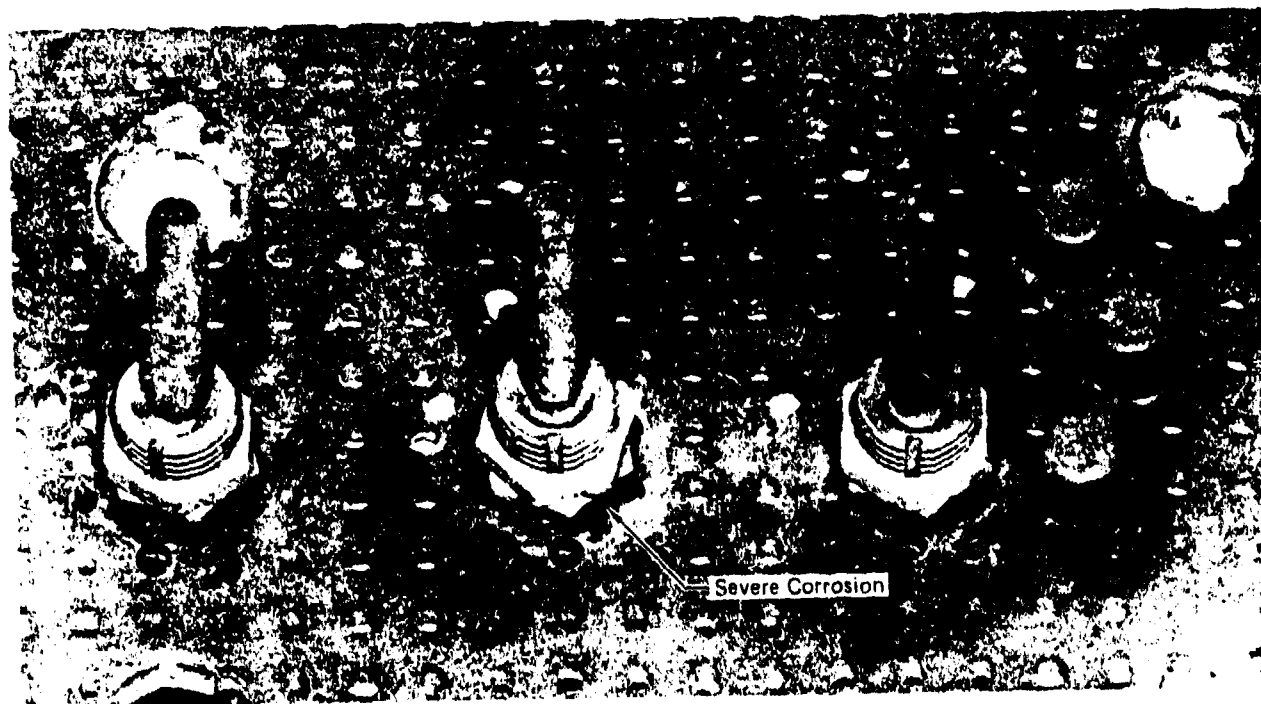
Corrosion on Tin Plated Pins of the 66 Pin Connector
